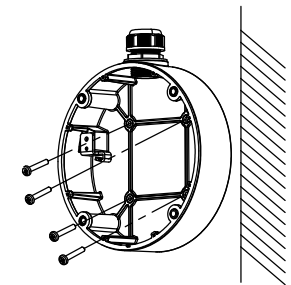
Secure the Junction Box' Camera Body to Ceiling/Wall
